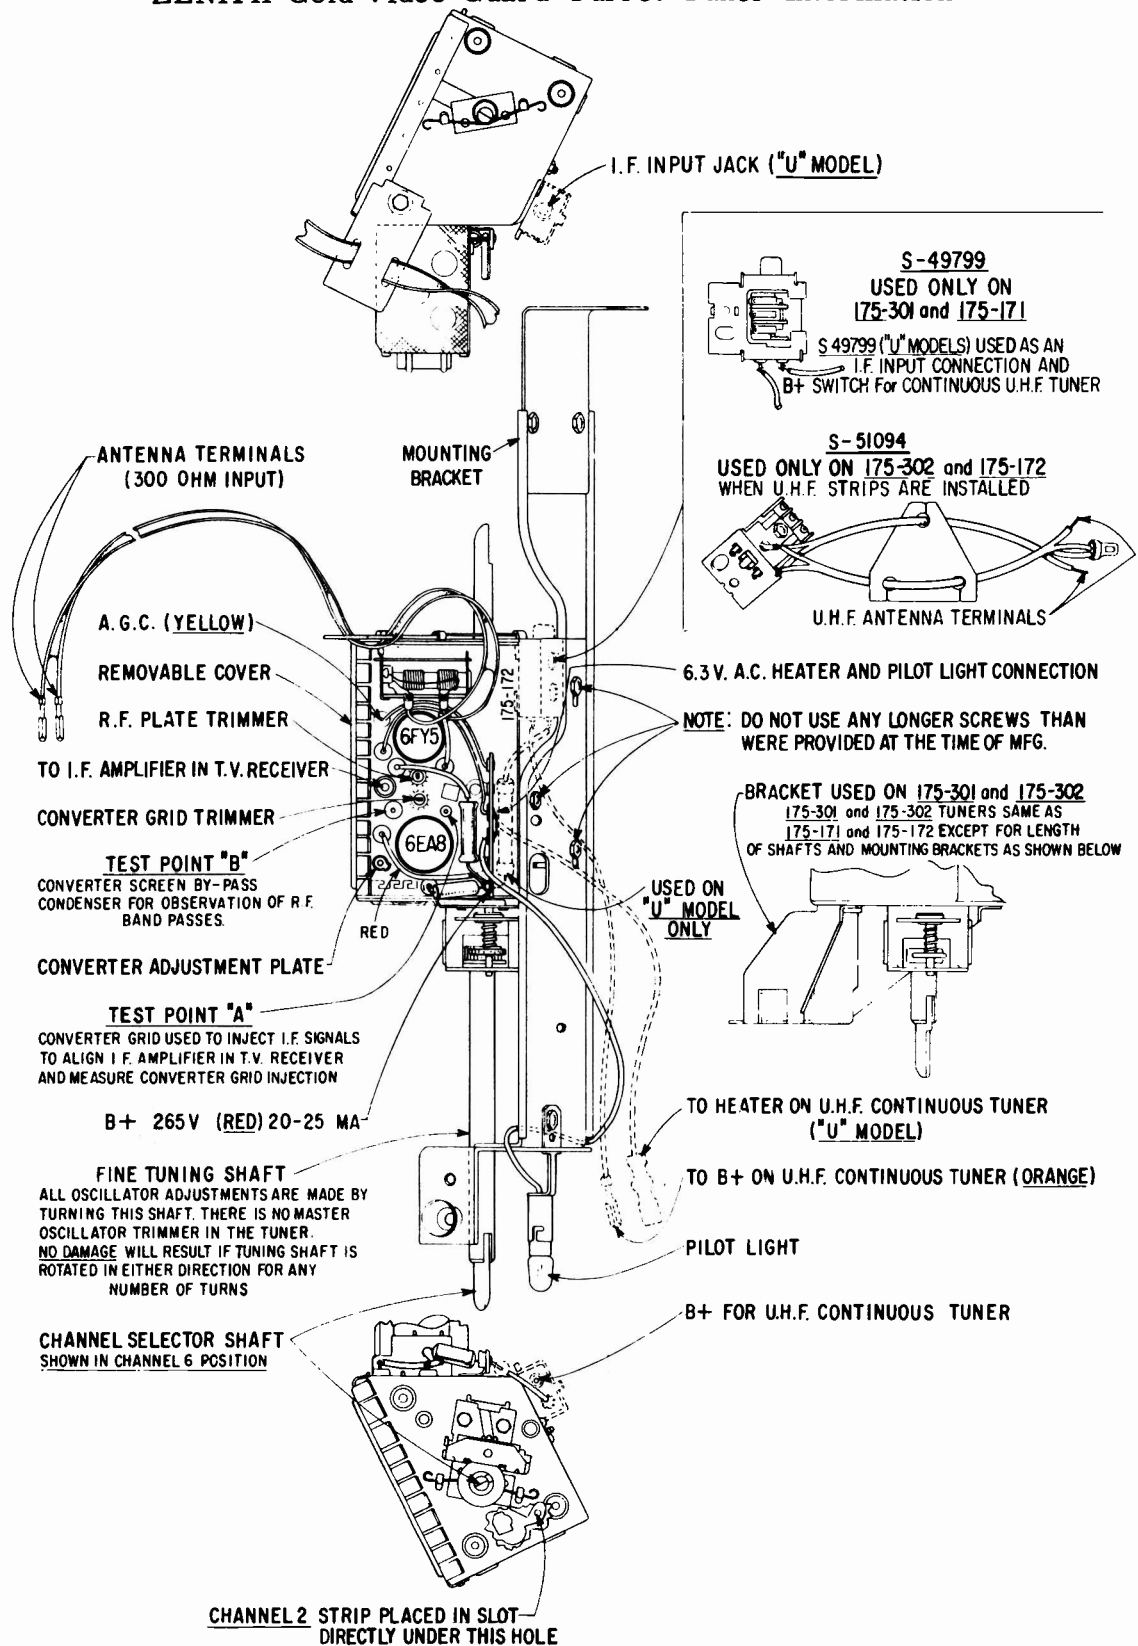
Tube and Trimmer Layout, Gold Video Guard Turret Tuner
